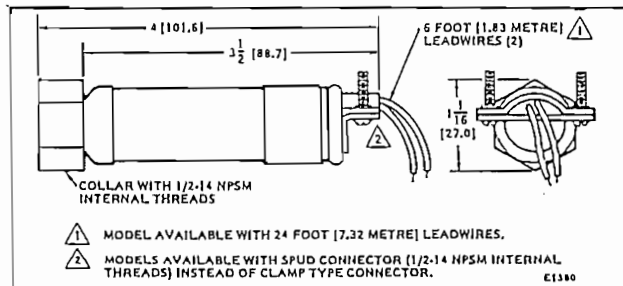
INSTALLATION DIMENSIONS OF THE C7027A, IN in. [mm IN BRACKETS].
